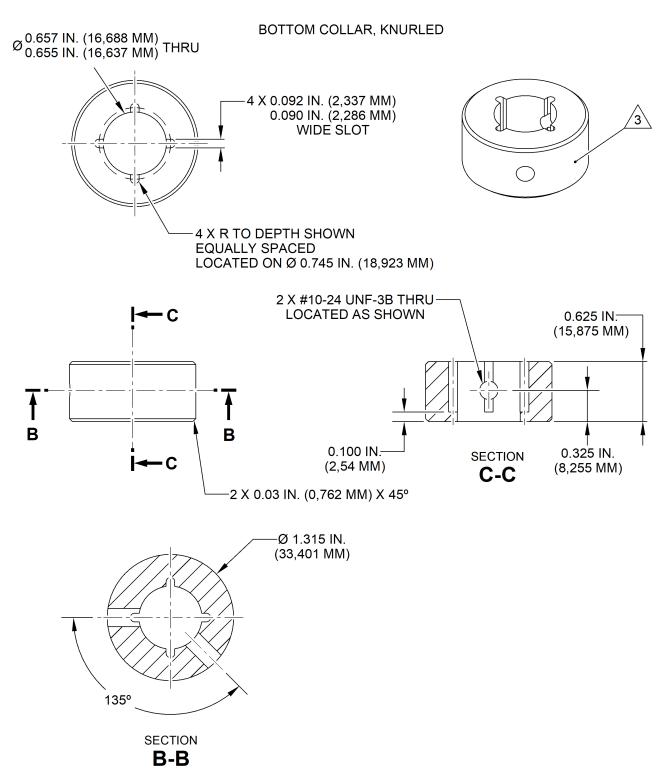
Dampener Plate Gauge (P/N 19-601076) (Sheet 3 of 4)
